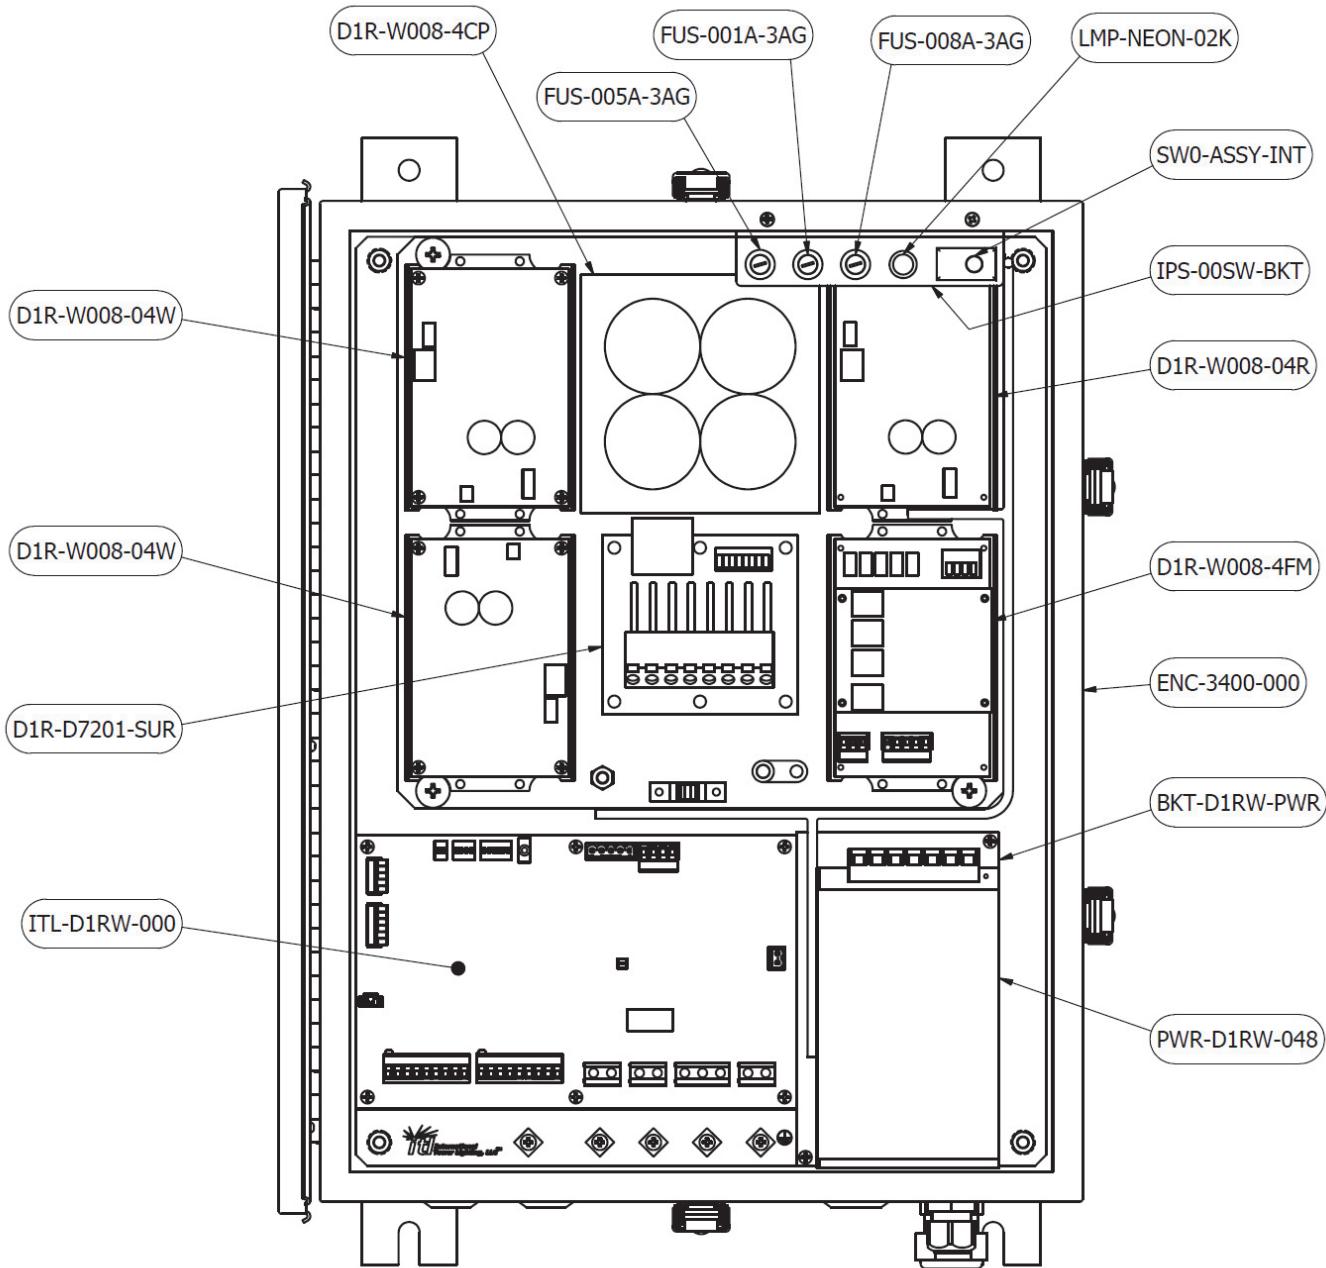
IPS-D1RW Power Supply Overall Component Layout
